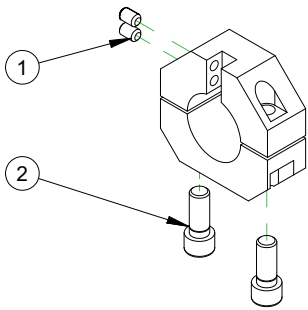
AXIAL FEED UNIT ASSEMBLY (P/N 43378)
